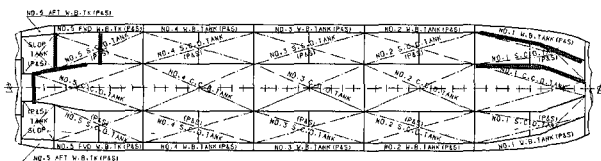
Tank arrangement for knuckled type inside longitudinal bulkhead
